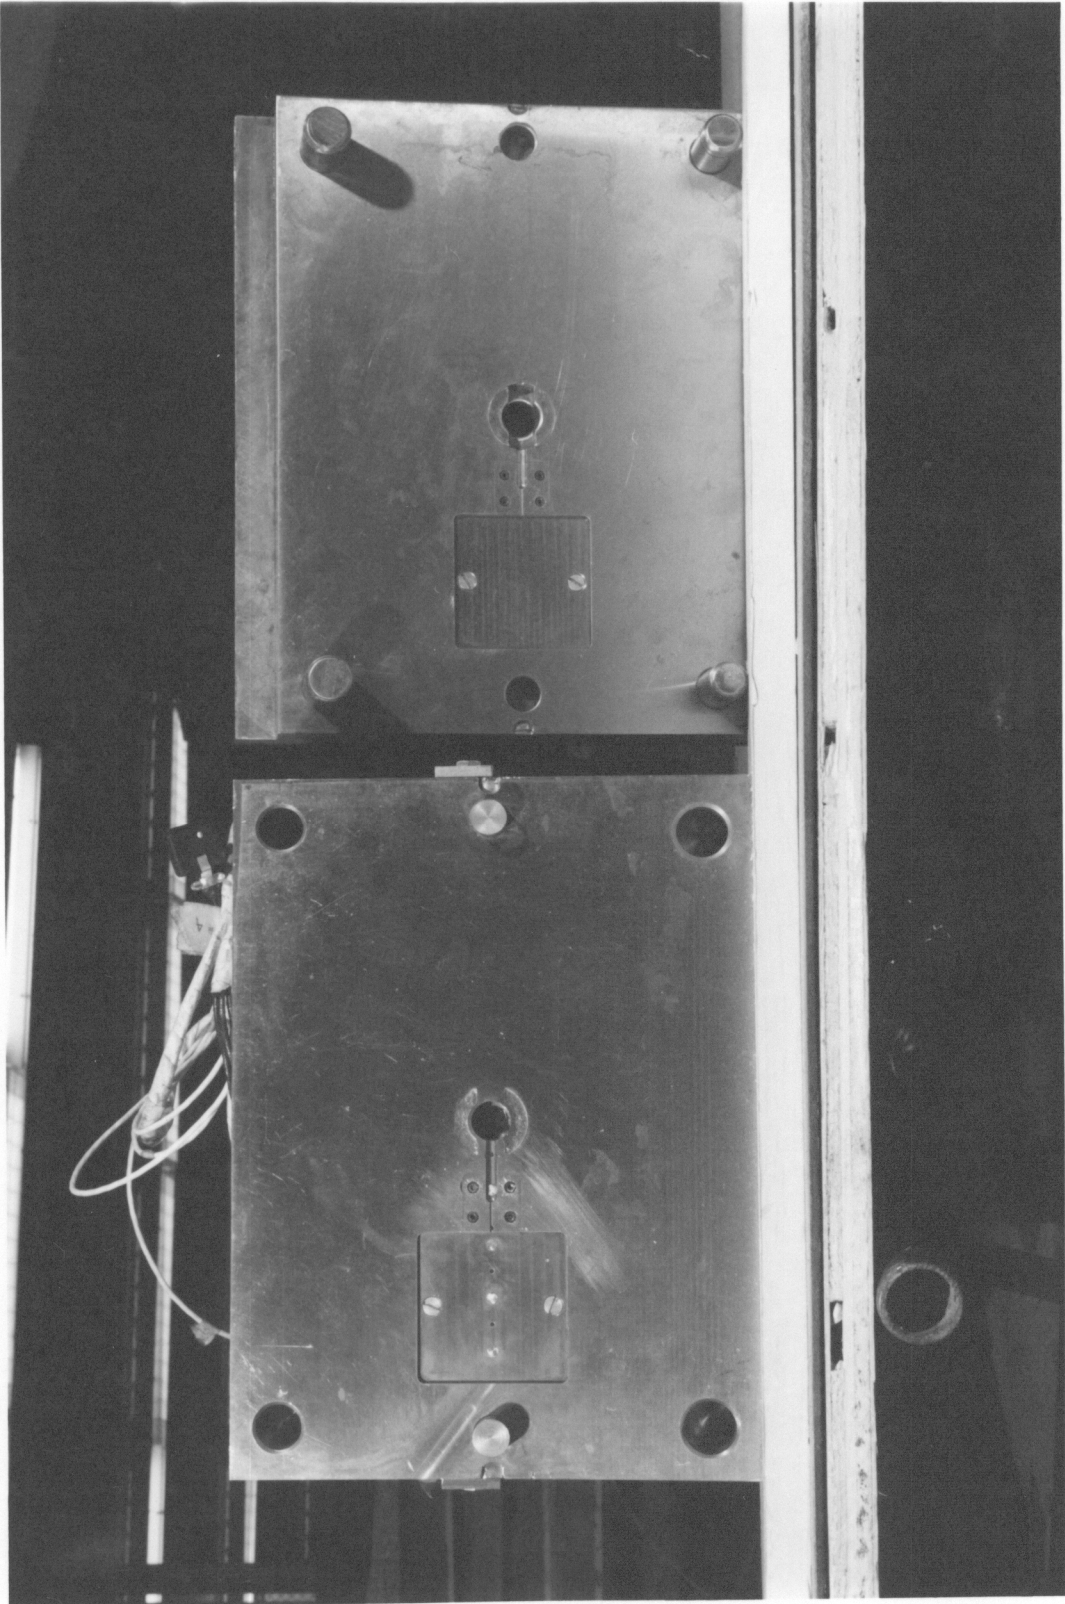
TOP AND BOTTOM CAVITY PLATES OF THE INJECTION MOLD
